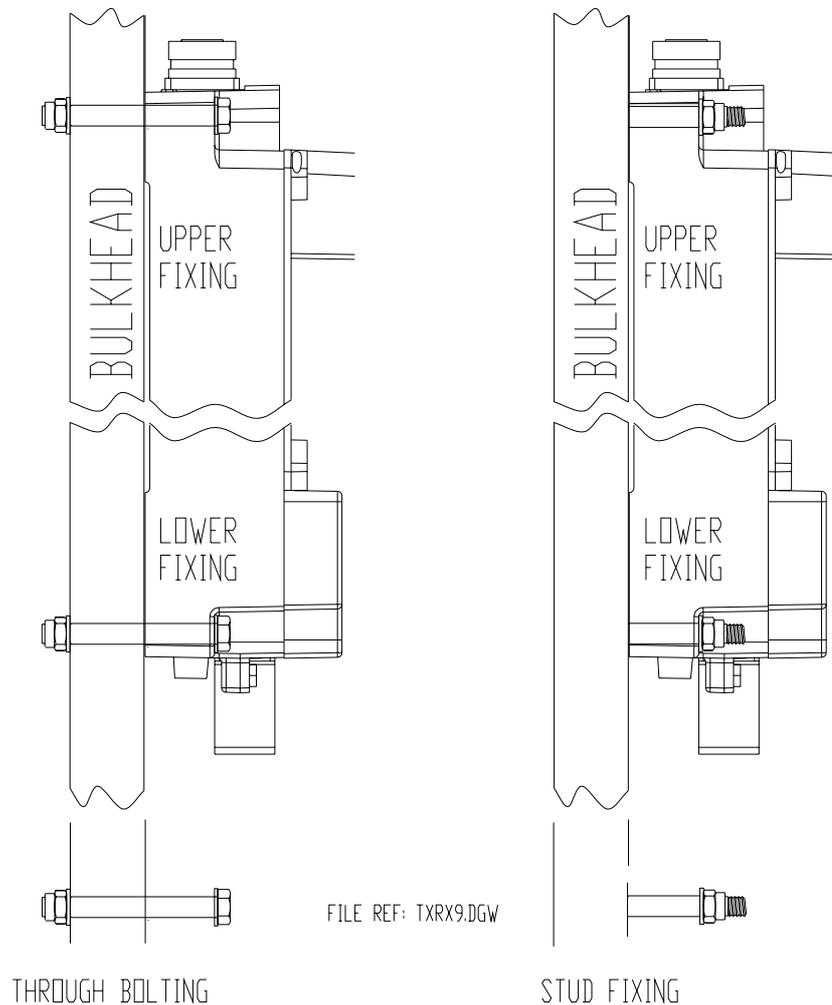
Bulkhead Transceiver – Mounting Alternatives
